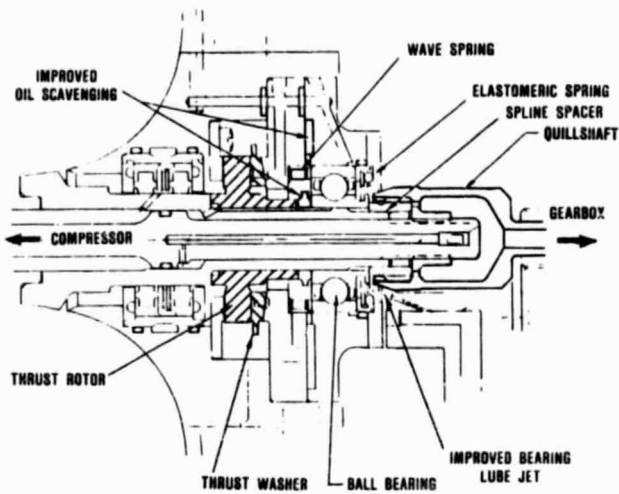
Hydrodynamic Thrust Bearing Design Improvements.
